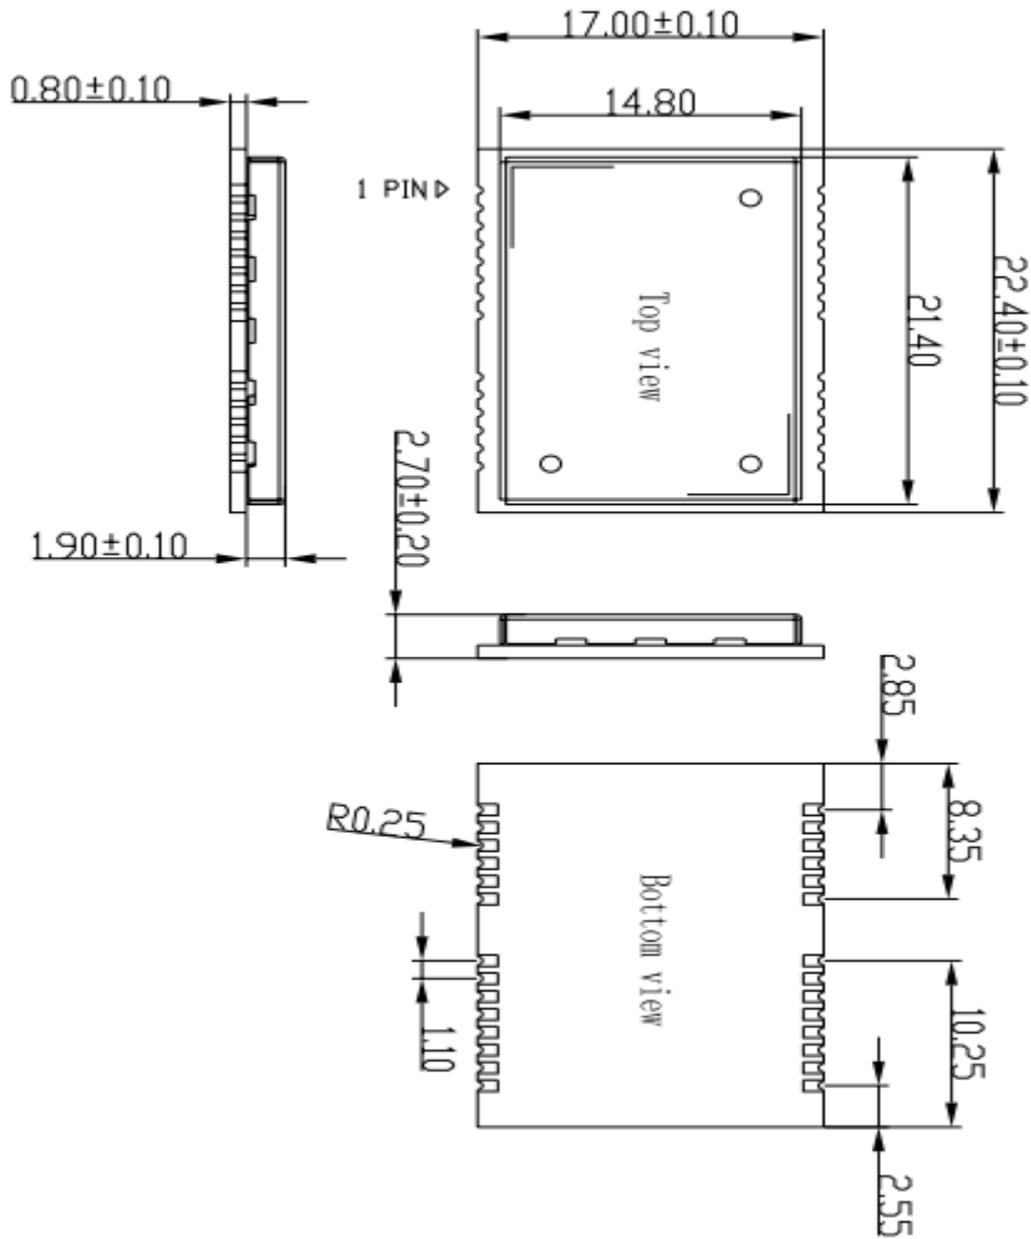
SIM68R mechanical dimensions (Unit: mm)
